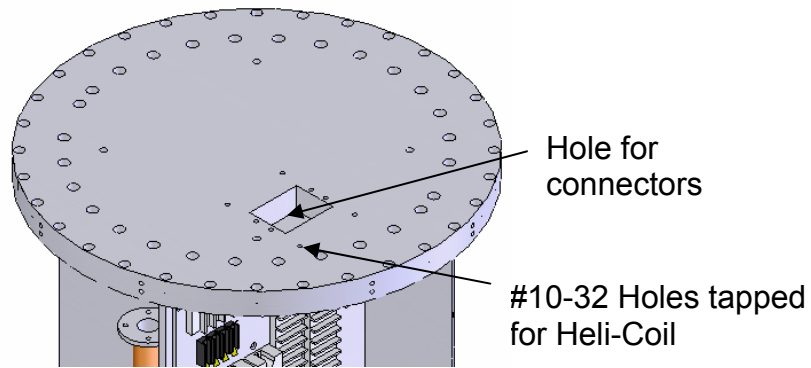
Connector Hole on CAPE Mounting Plate
